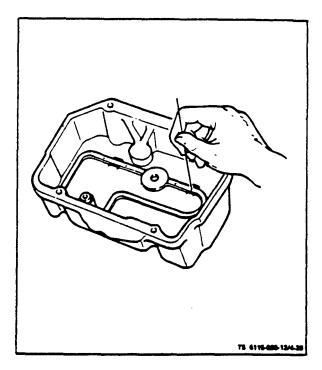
Cleaning Rocker Arm Cover Oil Line
